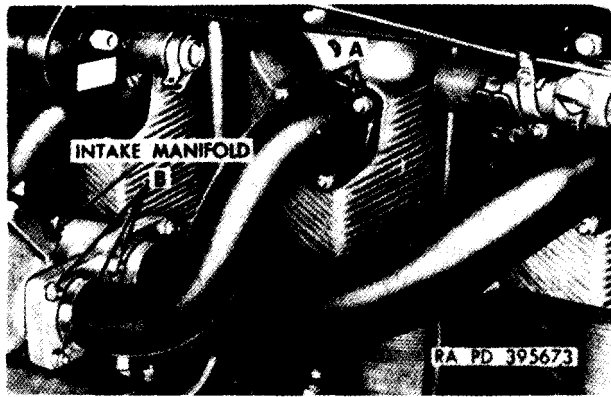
Disconnecting or connecting cylinder head oil drain tube hoses-cylinders 1L and 2L.
